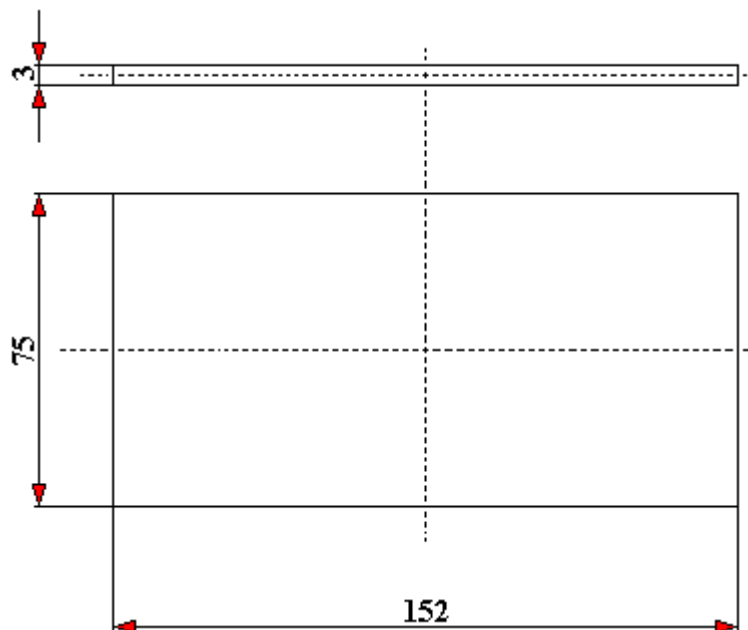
Example dimensions of joined sheets (both with the same dimensions) [239, 240, 241]
